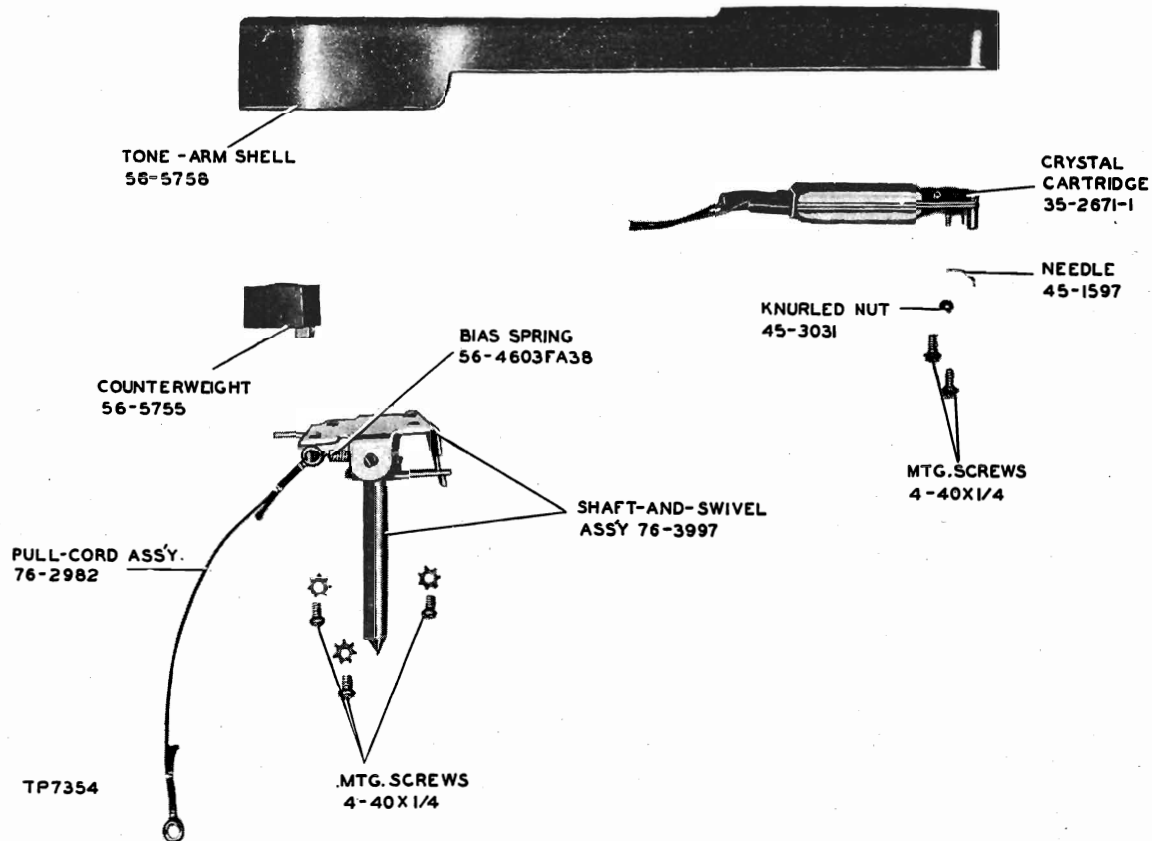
CHANGER TONE-ARM ASSEMBLY (35-2675)
